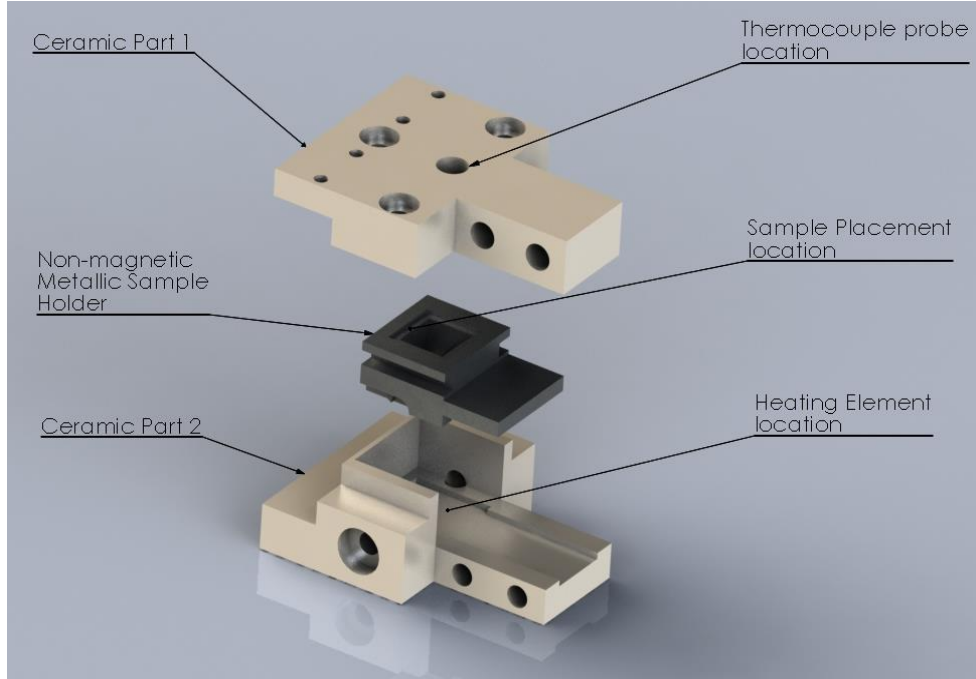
Schematic of the test fixture used within the HT-FMR setup in exploded view.
